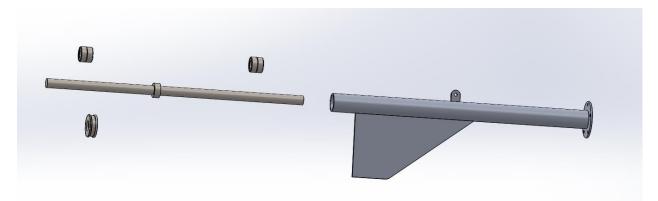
Exploded view of the driveshaft, housing, and three bearings it encompasses
